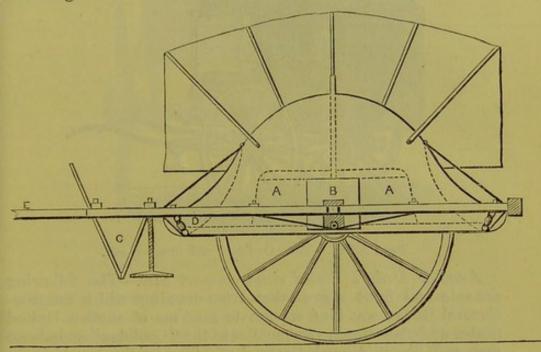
Fig. CXXV .- Sketch to show the construction of McAdam's cart for four patients sitting. (A) lockers for kits; (B) open space through the carriage for the axle to play in; (C) locker for firelocks; (D) india-rubber springs by which the body is slung in the square frame of the cart; (E) part of shaft.
